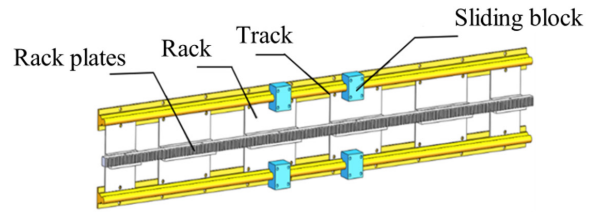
Overall assembly diagram of laser de-icing inspection device
